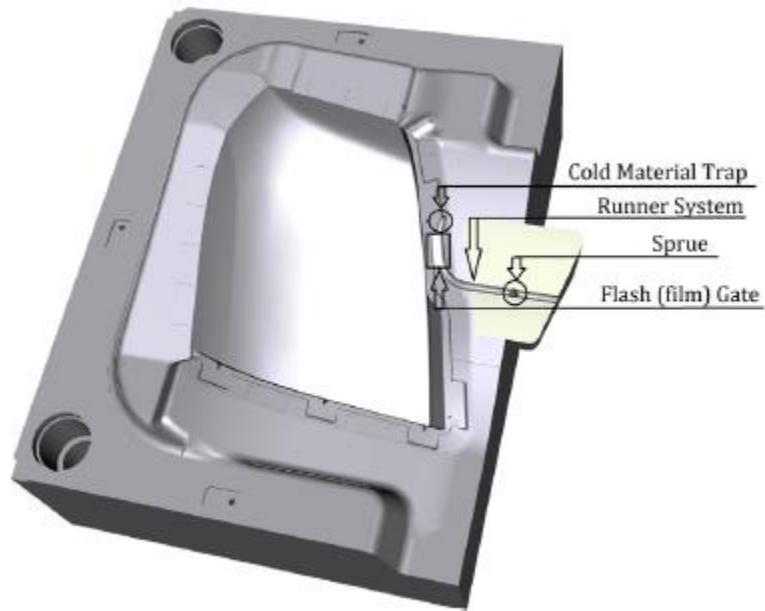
, 3DSolid model of PCL's injection molding tool cavity
